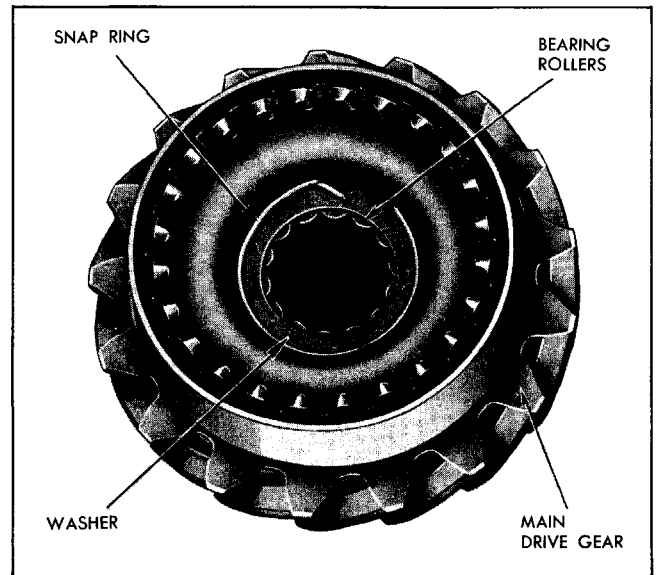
Rollers, Washer and Retainer in Main Drive Gear
